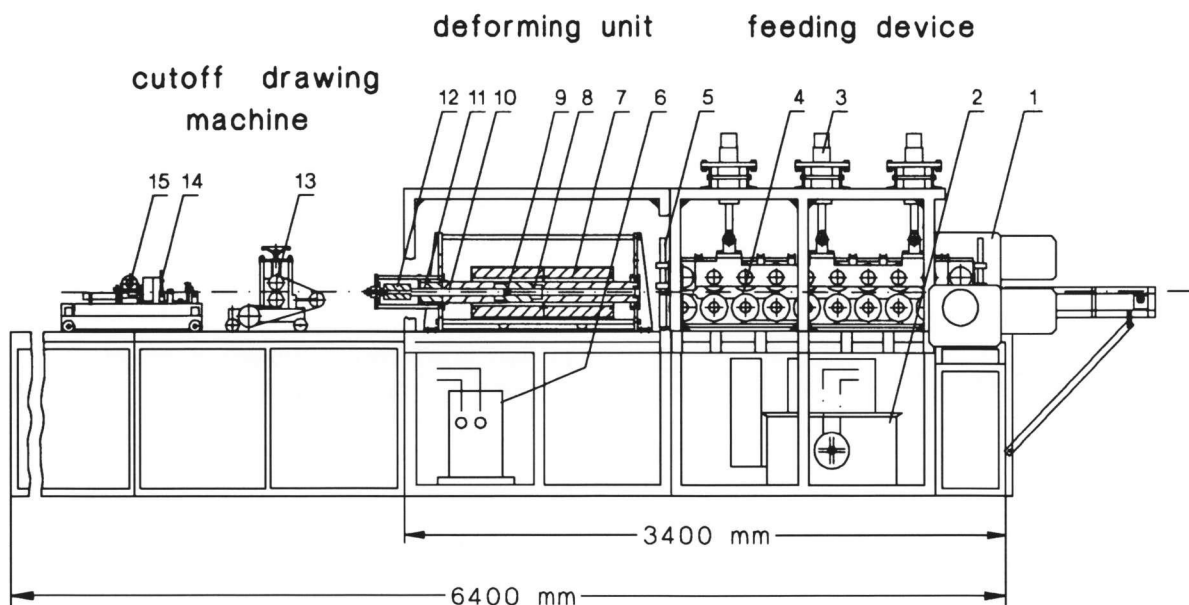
Schematic view of the continuously working pull extrusion equipment for glass. 1: bevel-gear drive motor; 2: hydraulic control unit; 3: hydraulic press cylinder; 4: feeding friction wheels; 5: vertical guide of the upper friction drive; 6: refrigerator; 7: resistance furnace; 8: container; 9: extrusion die; 10: cooling tract; 11: wall frictional force load cell; 12: die force load cell; 13: friction wheels; 14: scratch wheel; 15: shearing pin.
